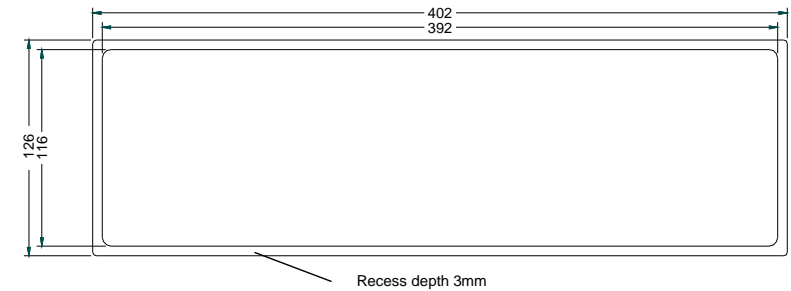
Recommended Panel Cut-out (all dimensions in mm).
